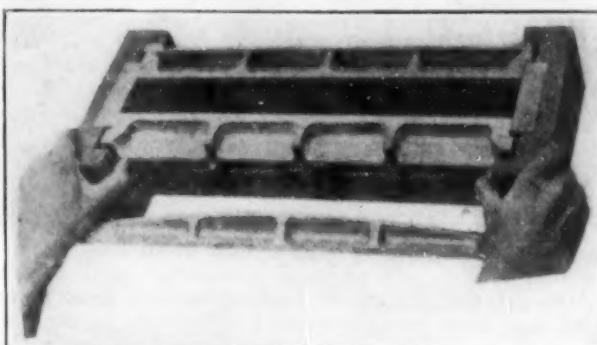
SHOWING METHOD OF ASSEMBLING MOLD BOX AFTER SAND HAS BEEN RIDDLED IN BOX
